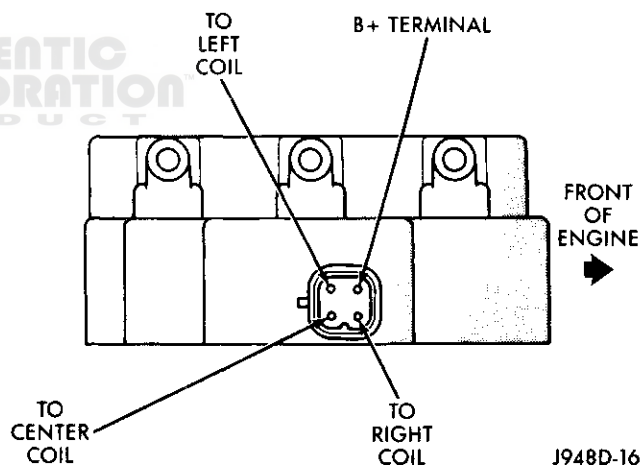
Checking Coil Primary Resistance—Front Coils—8.0L V-10 Engine
